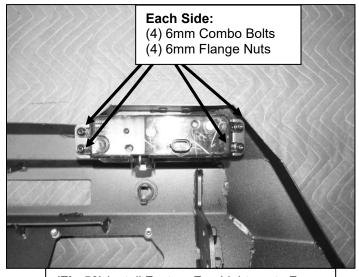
Secure the lower outer mount points of the active grille shutter assembly onto Upper Support Brackets using indicated hardware.
